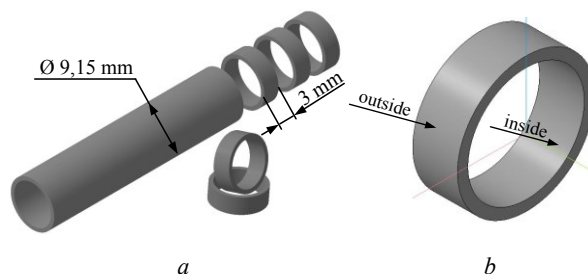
Scheme cutting (a) and the general view of the sample (b)
